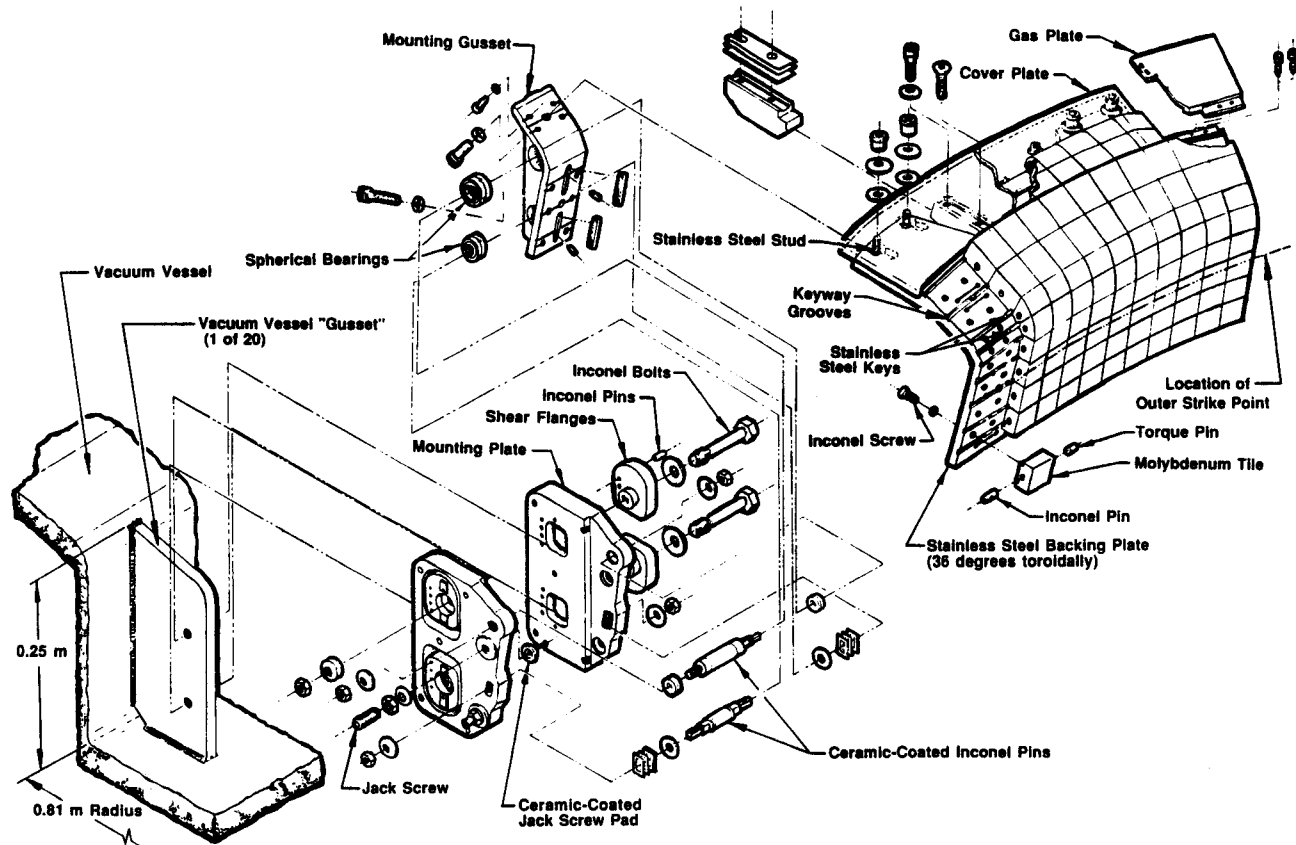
Portion of shaped divertor assembly about outer strike-point
